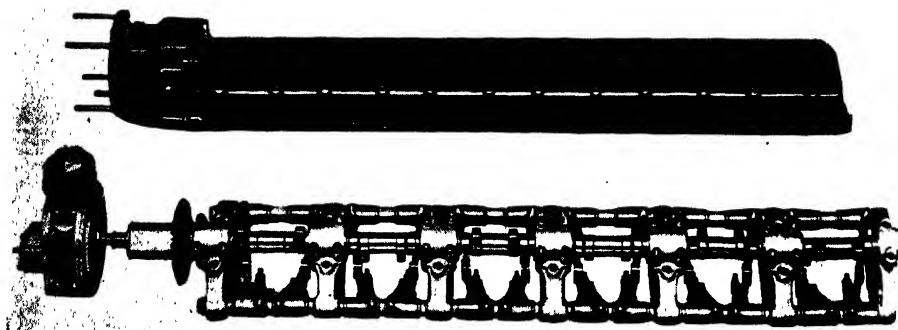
Camshaft and Rocker Mechanism, showing drive for B.T.H. Air Compressor.
